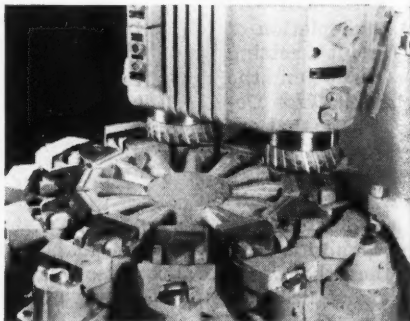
Closeup view of Rotary Table Showing Workpieces in Position
